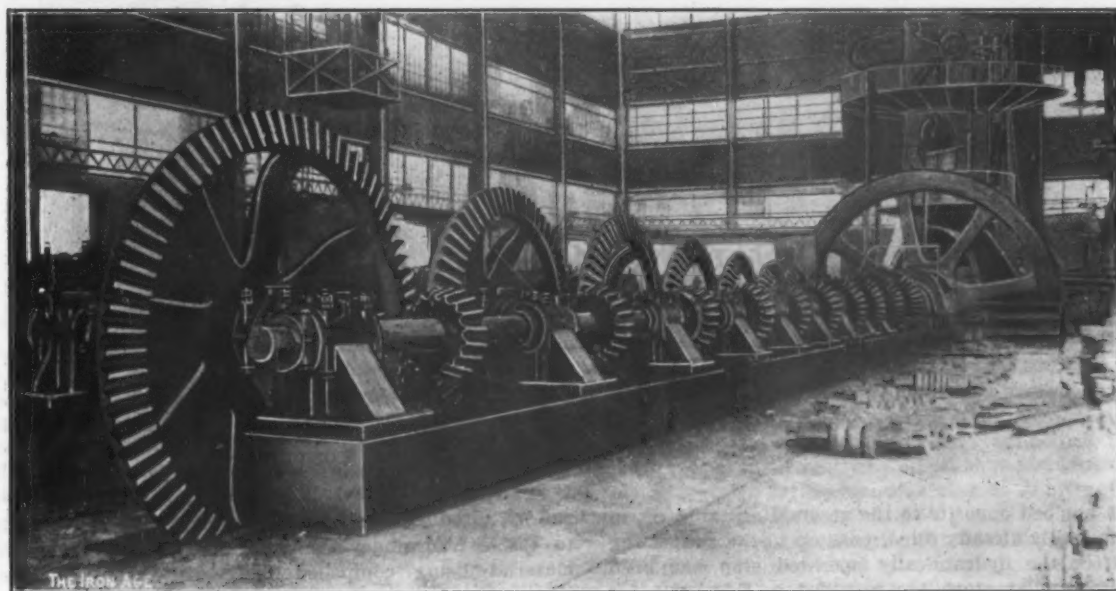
View of Bevel Gears Driving 14-Inch Continuous Mill.
